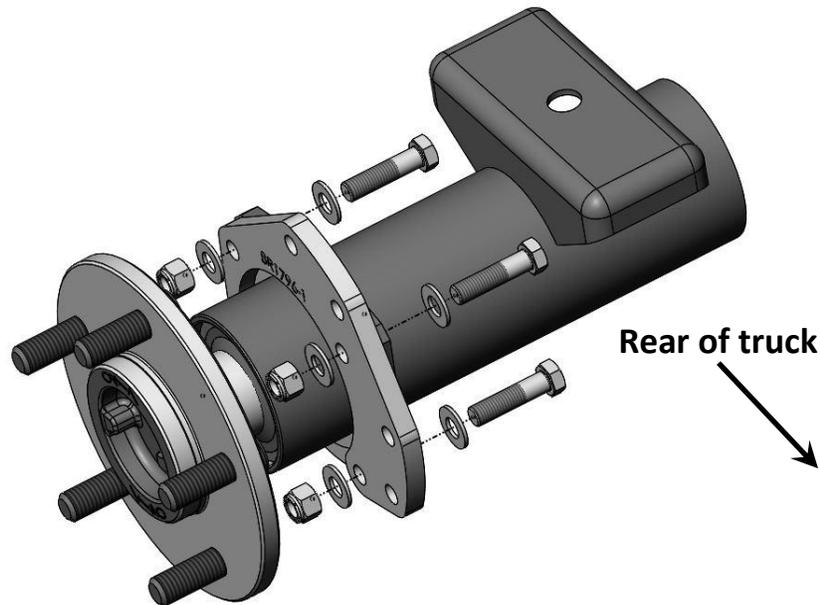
Axle Re-installed w/Primary Caliper Mounting Bracket Installation
